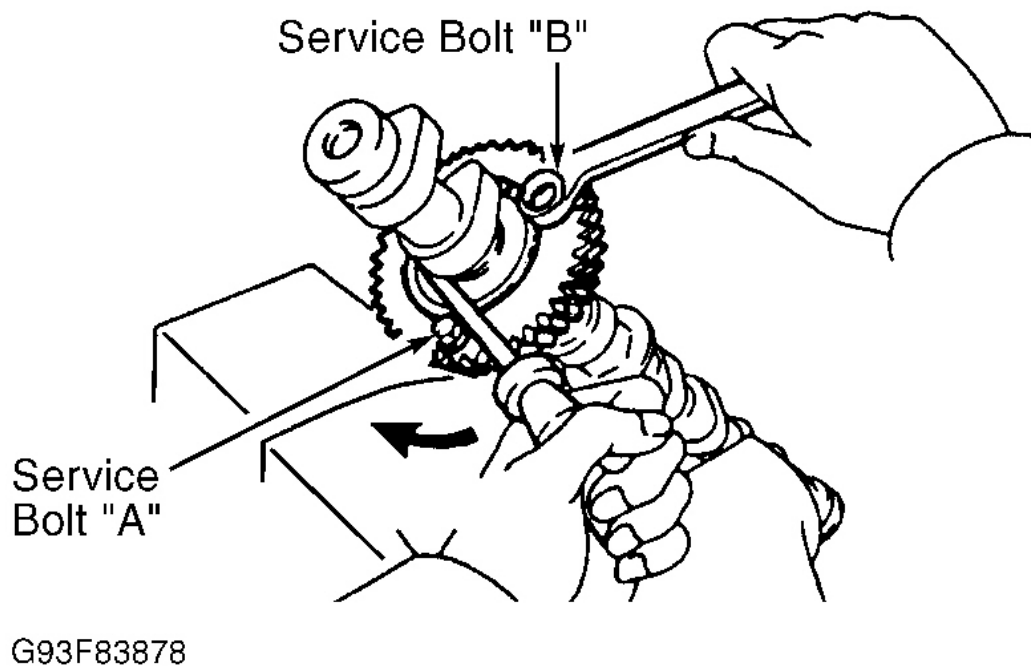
Removing & Installing Sub-Gear On Main Gear
